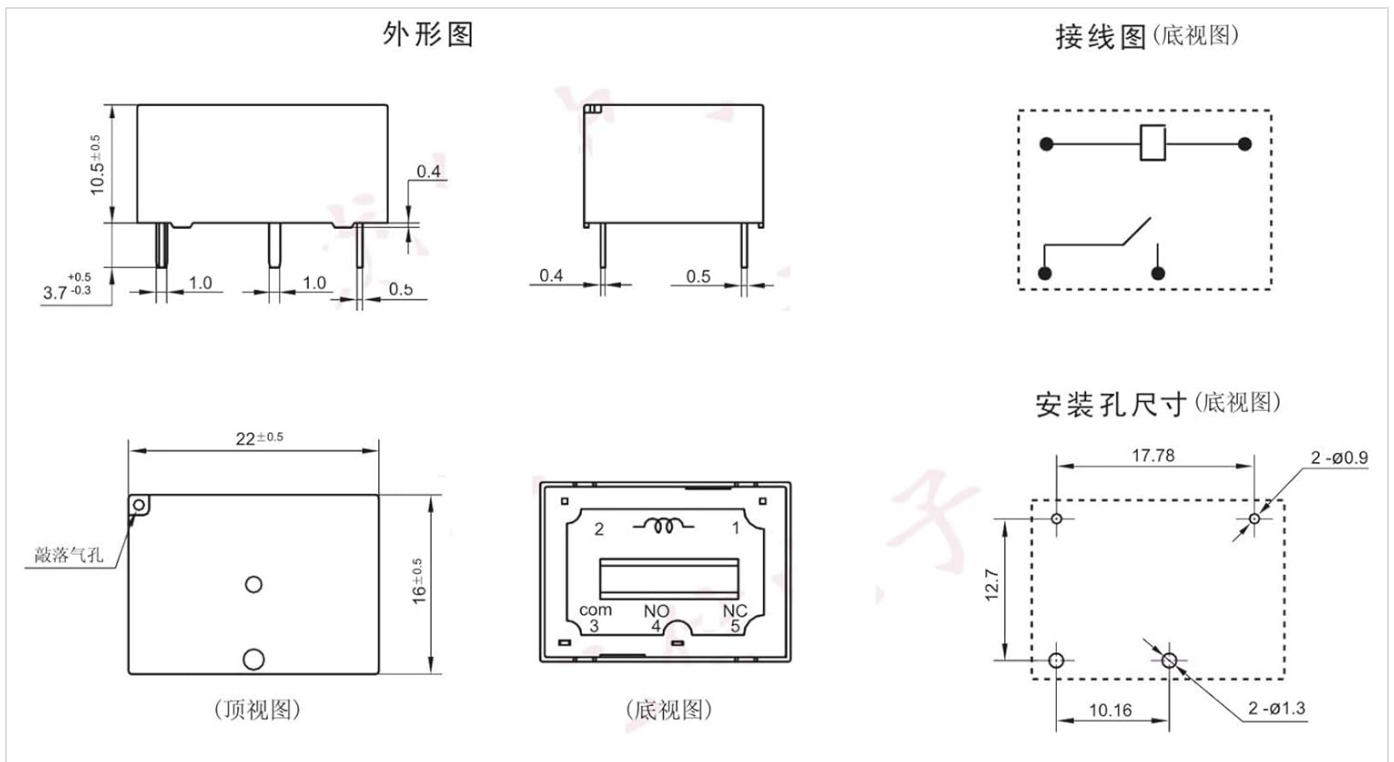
Technical drawing of the AOKLEY GN-1A series relay. This diagram illustrates the relay's external dimensions, internal wiring schematic, top view, bottom view with pin assignments, and recommended mounting hole dimensions. Key dimensions include overall length (22 ± 0.5 mm), width (16 ± 0.5 mm), and height (10.5 ± 0.5 mm). Pin dimensions are also detailed.
